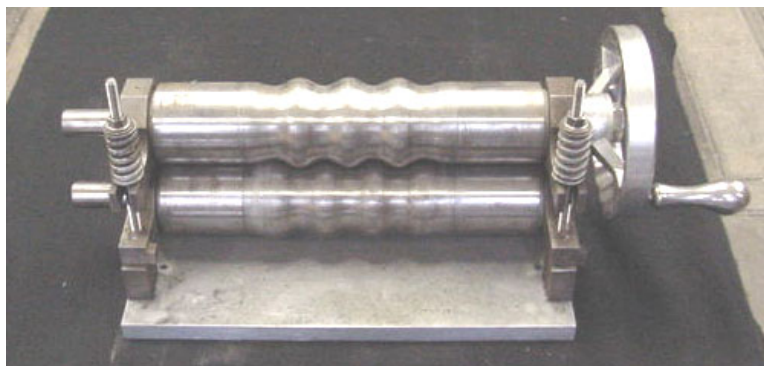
Steel rollers used to form the copper plate into a sinusoidal shape. The surfaces of the rollers are machined into a sinusoidal profile on a CNC lathe.
